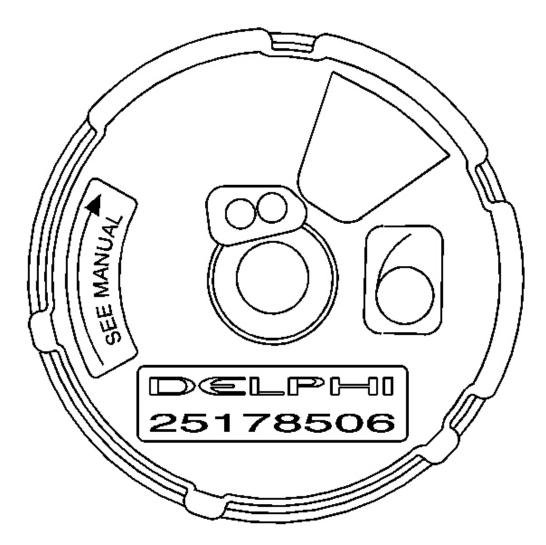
Identifying Camshaft Position (CMP) Actuator Courtesy of GENERAL MOTORS CORP.
